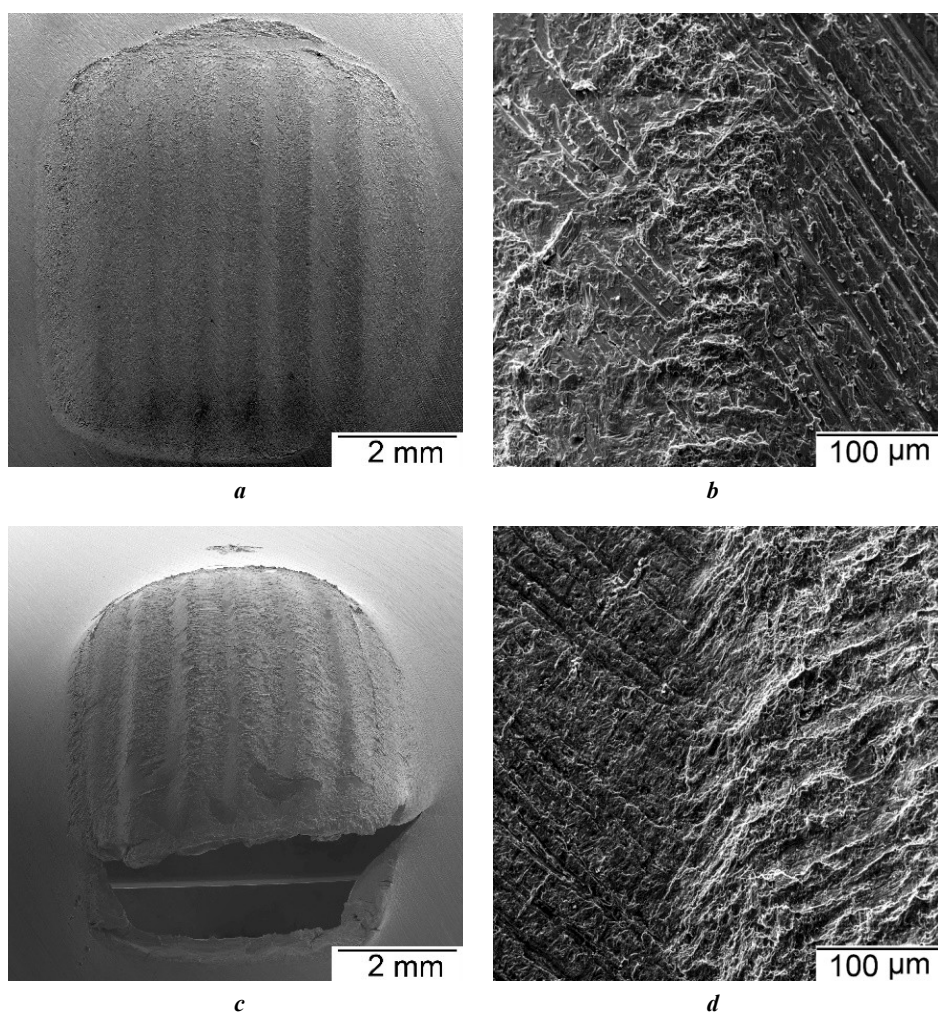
Typical images of fracture surfaces of samples produced by ultrasonic welding with a tool with a tooth height of $H=0.4$ mm:
